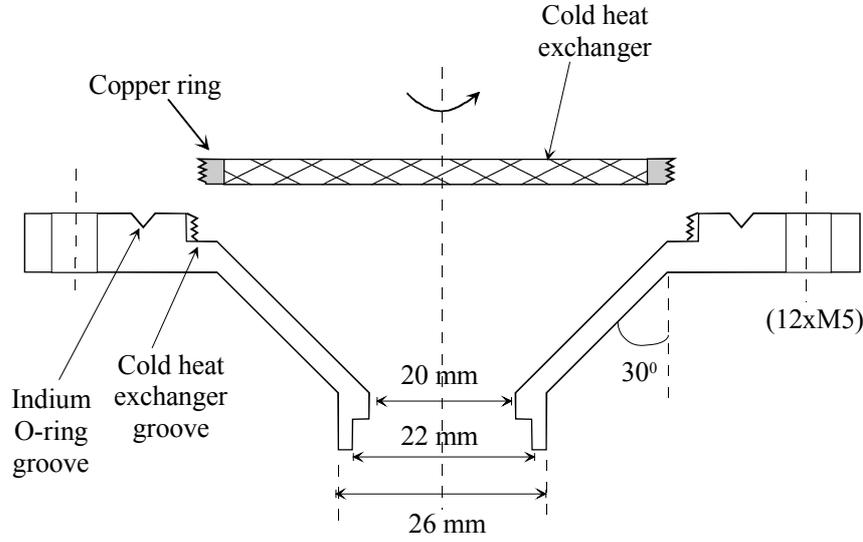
The mounting procedure of the cold heat exchanger in the aluminium taper is illustrated. The spiral cold heat exchanger is soldered in a copper flange with a screw structure so that it can be screwed into the taper.
